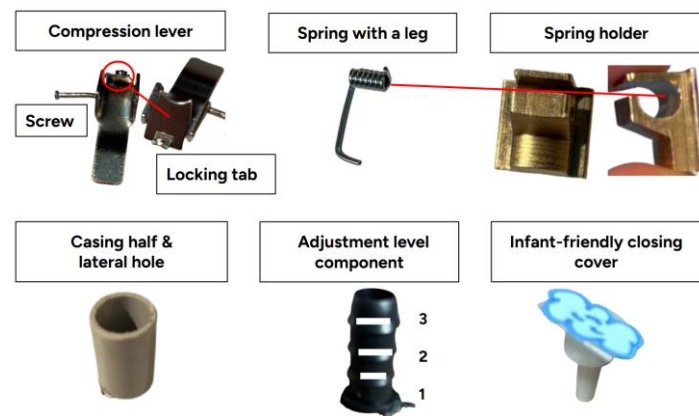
Different components required to assemble the lever-based mechanism.
